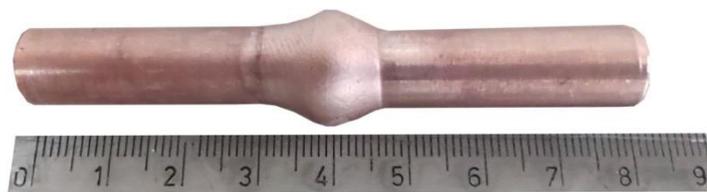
Example view of the upset specimen after the welding simulation at a temperature of 660°C and a length reduction of 10 mm
